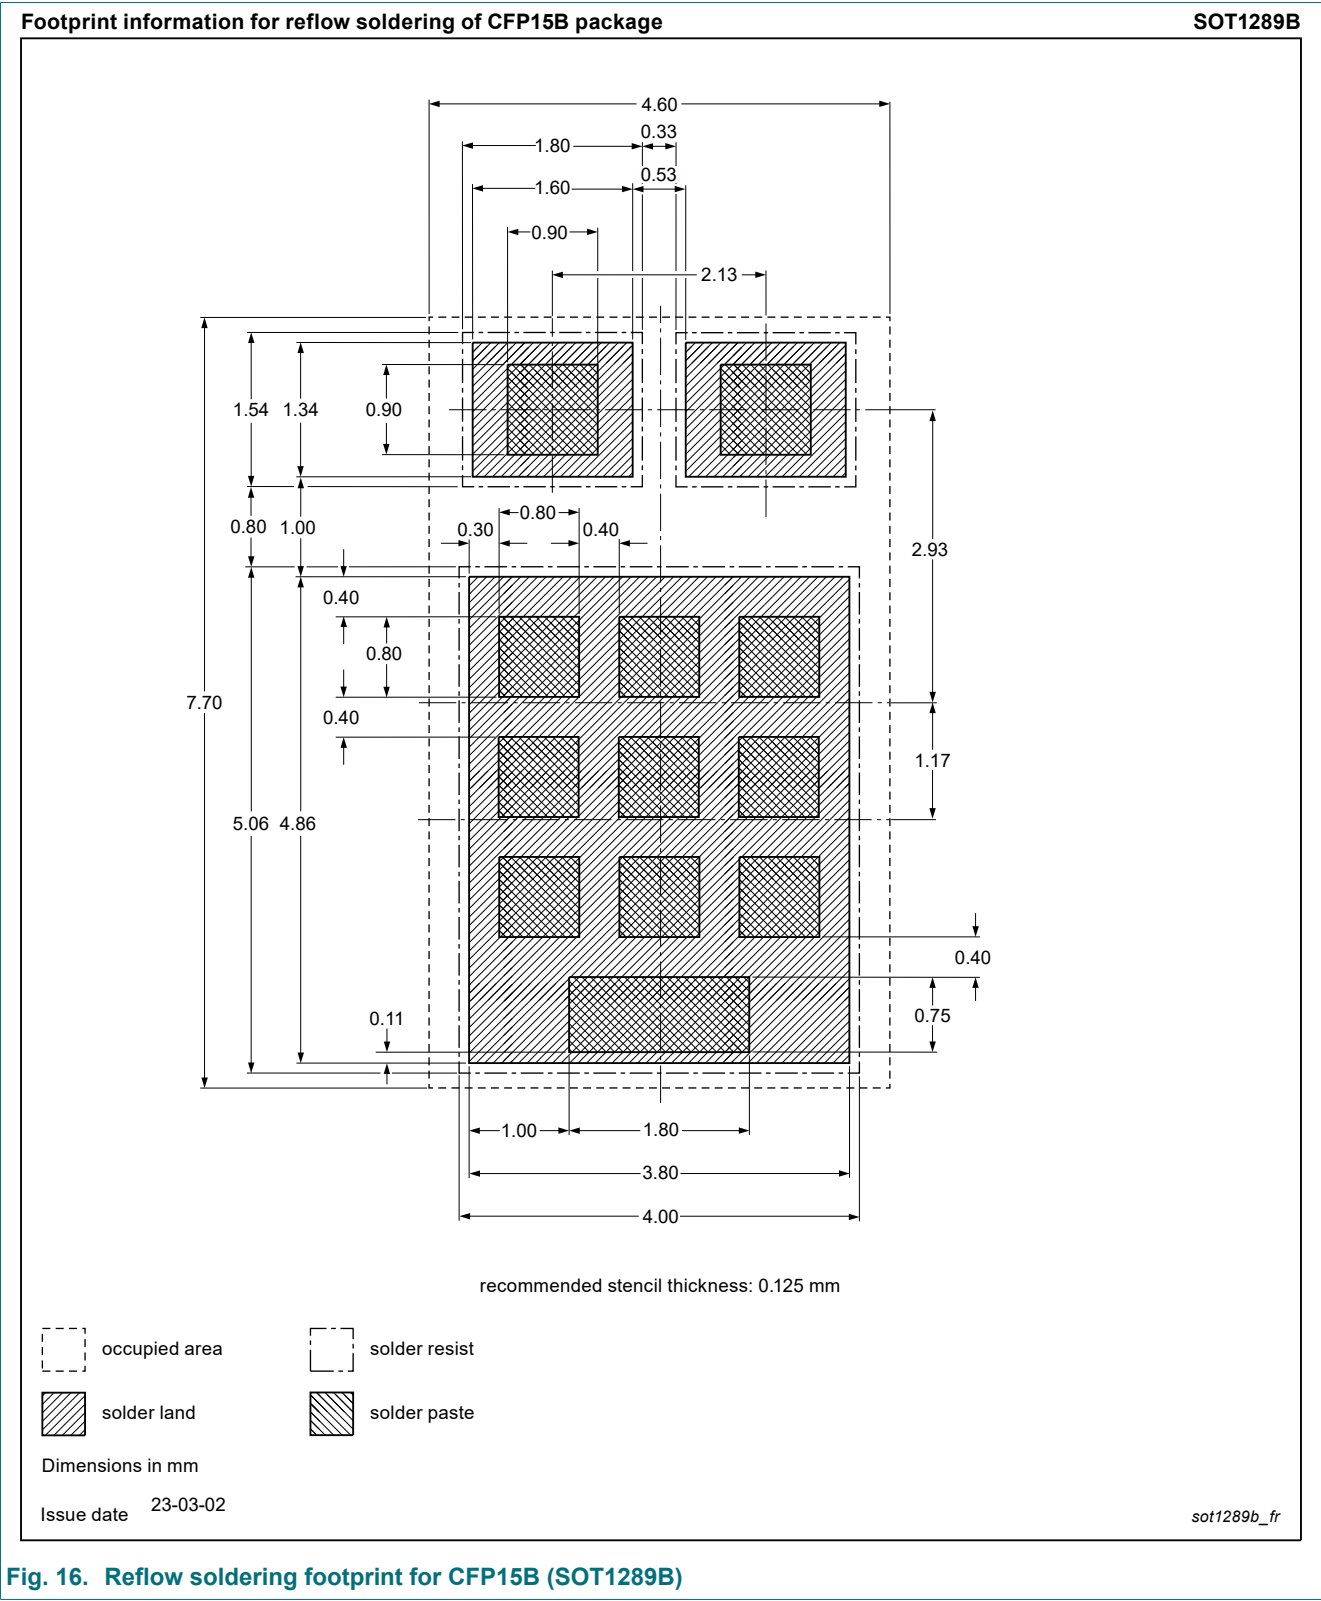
Reflow soldering footprint for CFP15B (SOT1289B)
